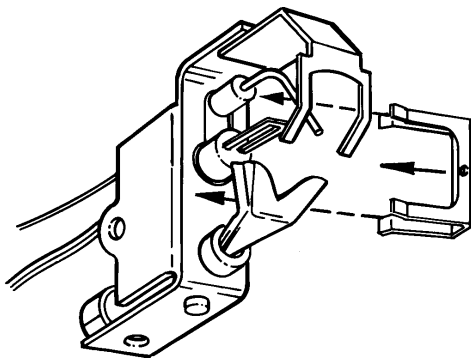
IGNITOR AND FLAME SENSOR ASSEMBLY
